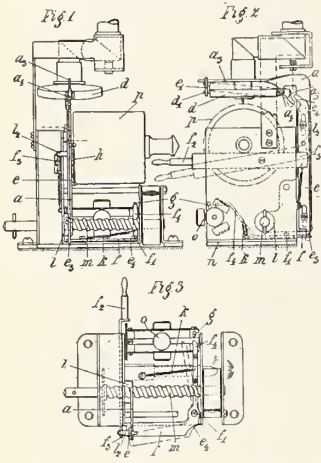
represents a rear view of a machine embodying the essential parts of the invention; Fig. 2 shows a side elevation, and Fig. 3 a horizontal section, just above the driving spindle.
